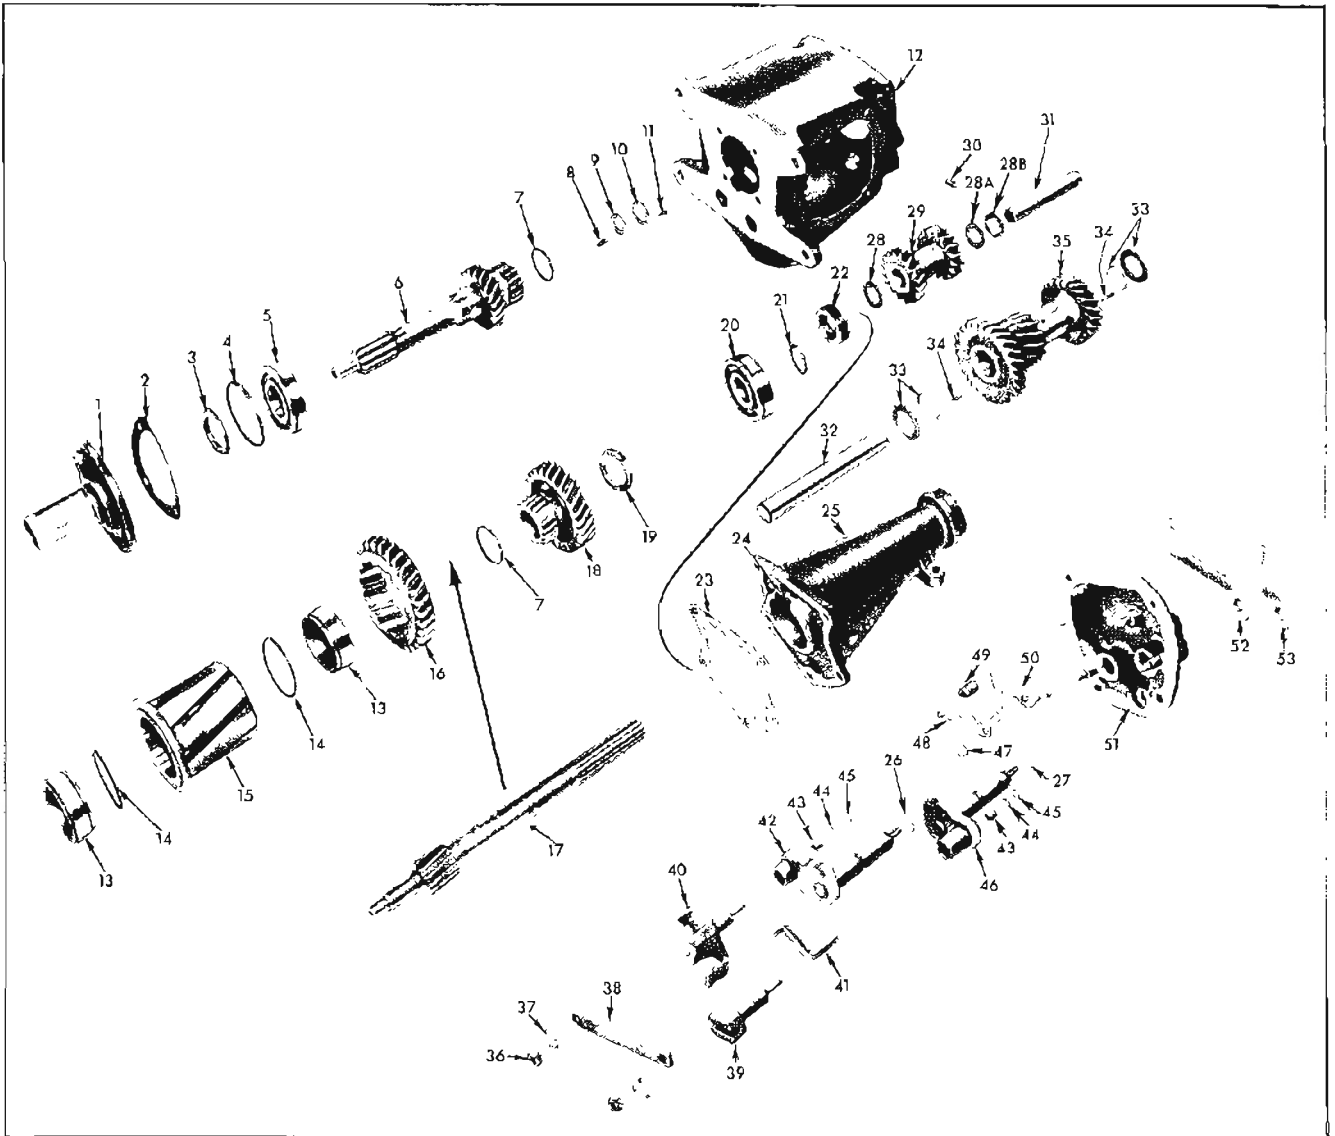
Exploded View of 3-Speed Synchromesh Transmission
